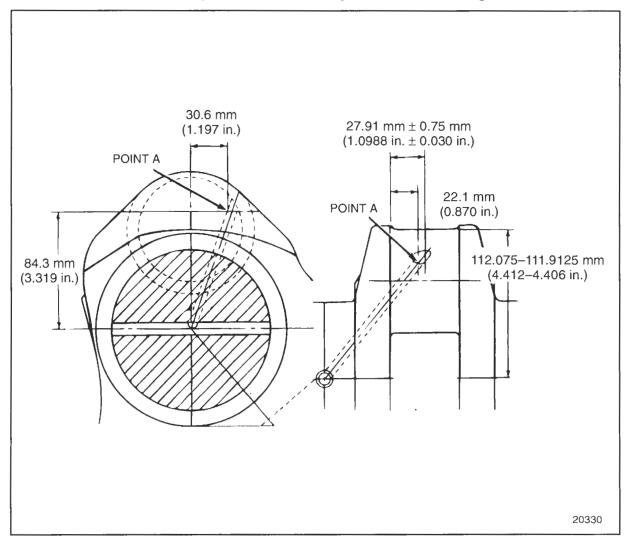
Oil Hole Specifications – Connecting Rod Journals – Crankshaft (160 mm stroke)
